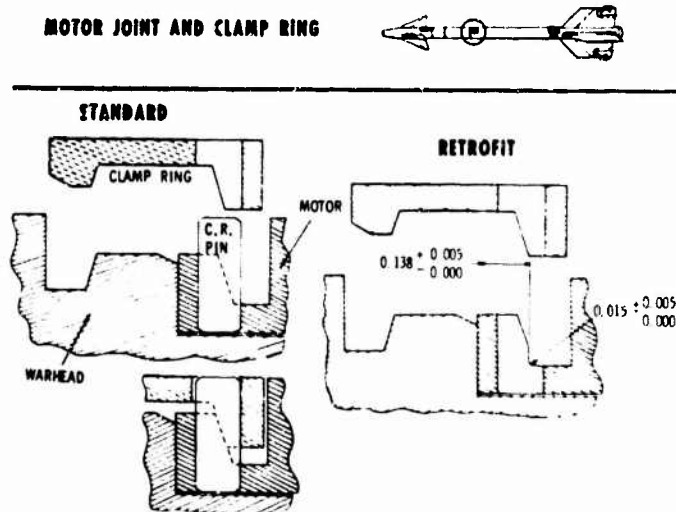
Comparison Between Standard and Modified Motor Tube Grooves
